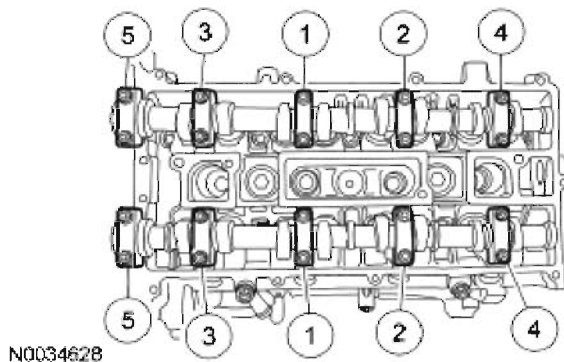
Identifying Loosening/Tightening Sequence Of Camshaft Bearing Bolts
